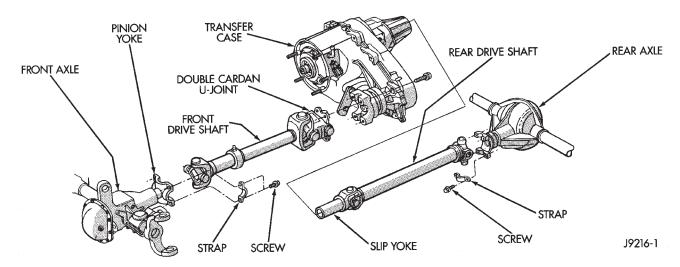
Front & Rear Propeller Shafts—Typical 4WD
